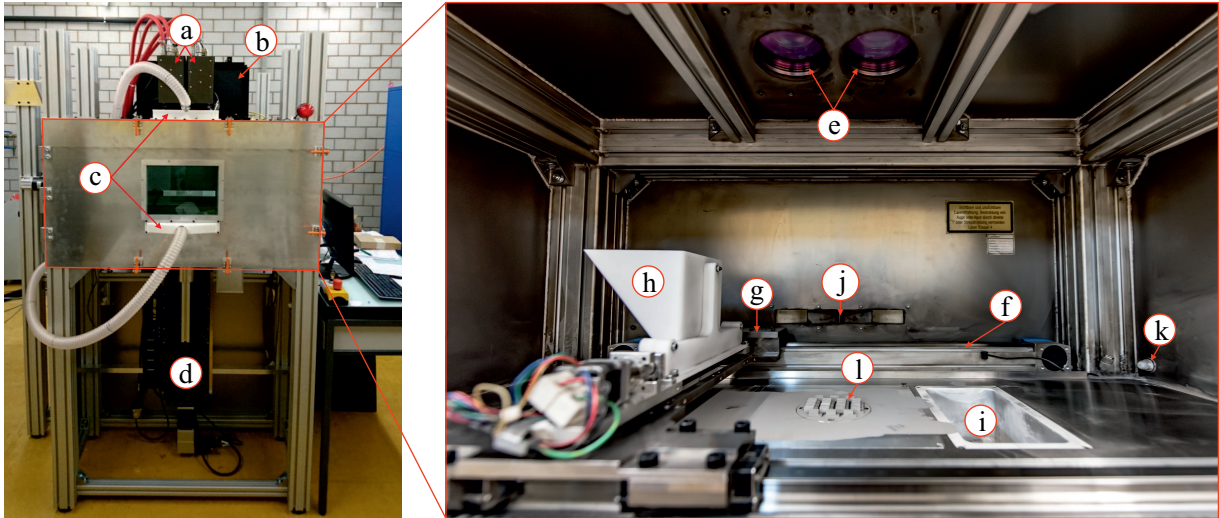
Picture of the laboratory machine and a close-up of the build chamber. a) scan head 1 (right) and scan head 2 (left), b) box of beam path including beam expanders, c) shielding gas inlets, d) z-axis, e) laser inlet windows, f) belt drive for powder deposition, g) powder deposition unit, h) powder reservoir, i) powder overflow, j) shielding gas outlet, k) oxygen sensor and l) the build plate, here with parts at an elevated level.
